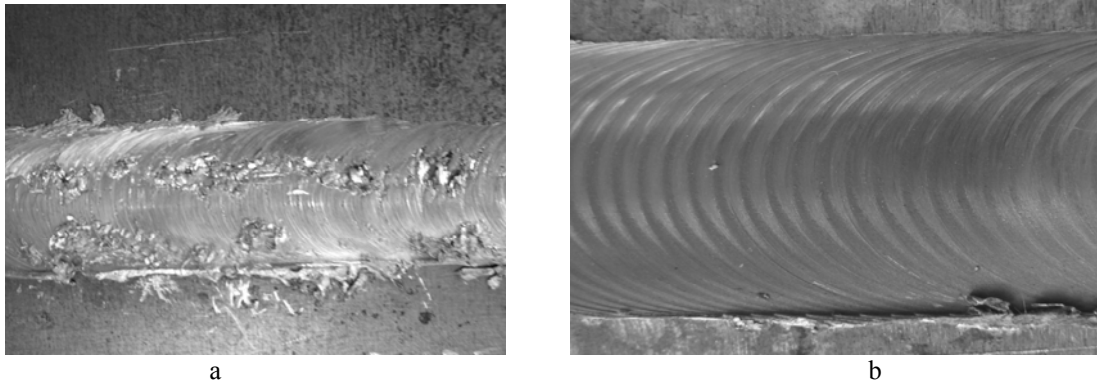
Appearance of friction stir weld: a - typical defective friction stir weld ( $N = 1900$  rpm,  $S = 120$  mm/min,  $D = 5$  mm and  $F = 34.33$  kN), b - close view of typical defective free friction stir weld ( $N = 1300$  rpm,  $S = 70$  mm/min,  $D = 5$  mm and  $F = 24.53$  kN)
